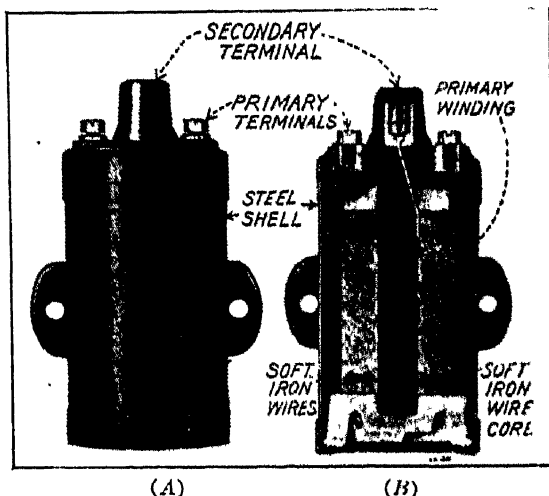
Bosch, type TC-30 ignition coil. (A) External view. (B) Sectional view.
